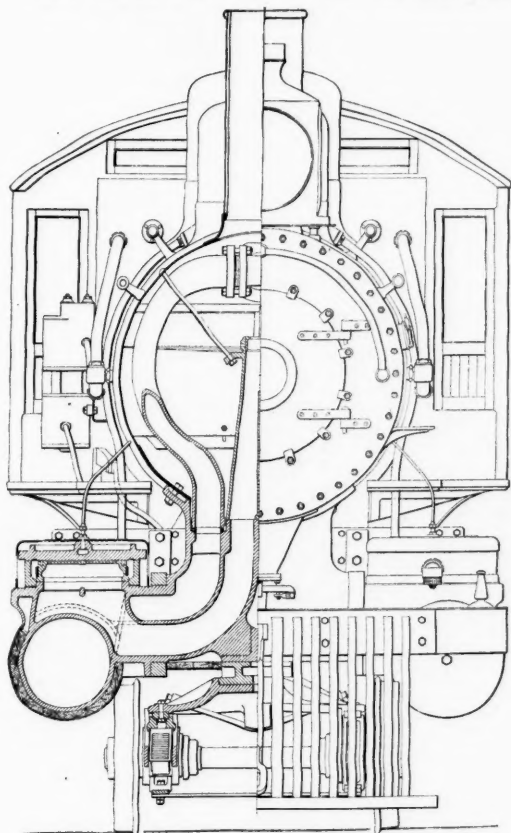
Front Elevation and Cross-Section through Cylinder.
